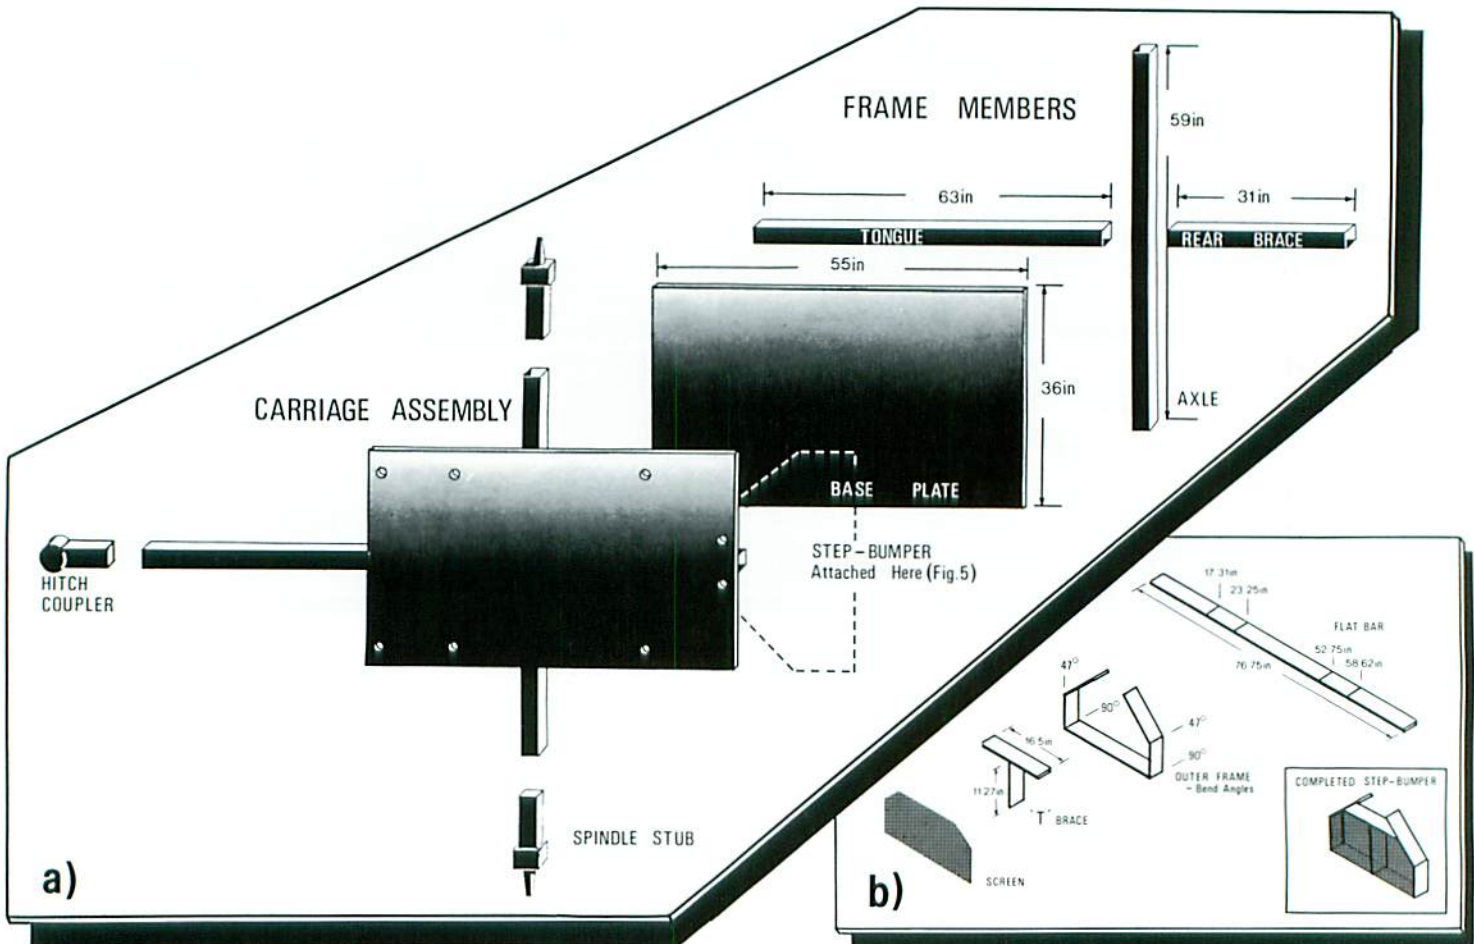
a) Diagram showing dimensions and placement of base plate on frame members. b) Diagram showing step bumper frame bending positions and assembly.
